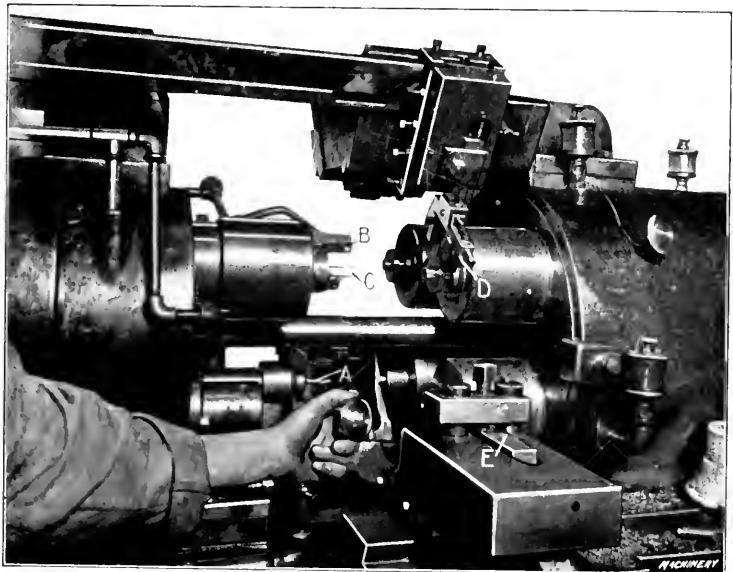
Tooling "Set-up" used for producing a Brass Thumb-nut
